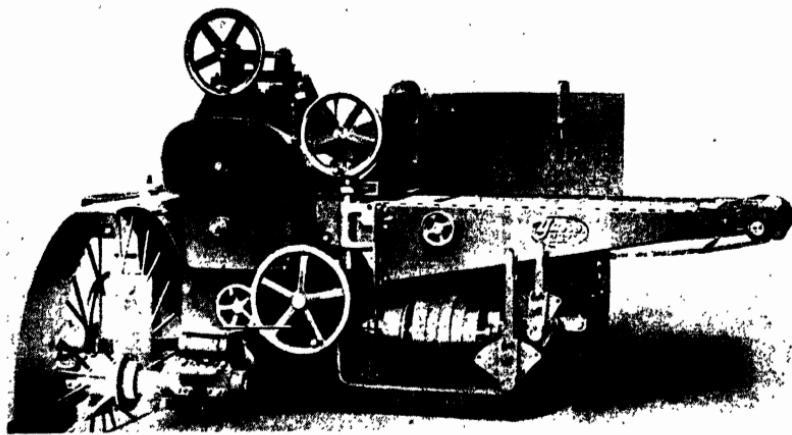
A large horizontal band resaw with chain conveyor feed. (*Courtesy of the P. B. Yates Machine Company.*)
